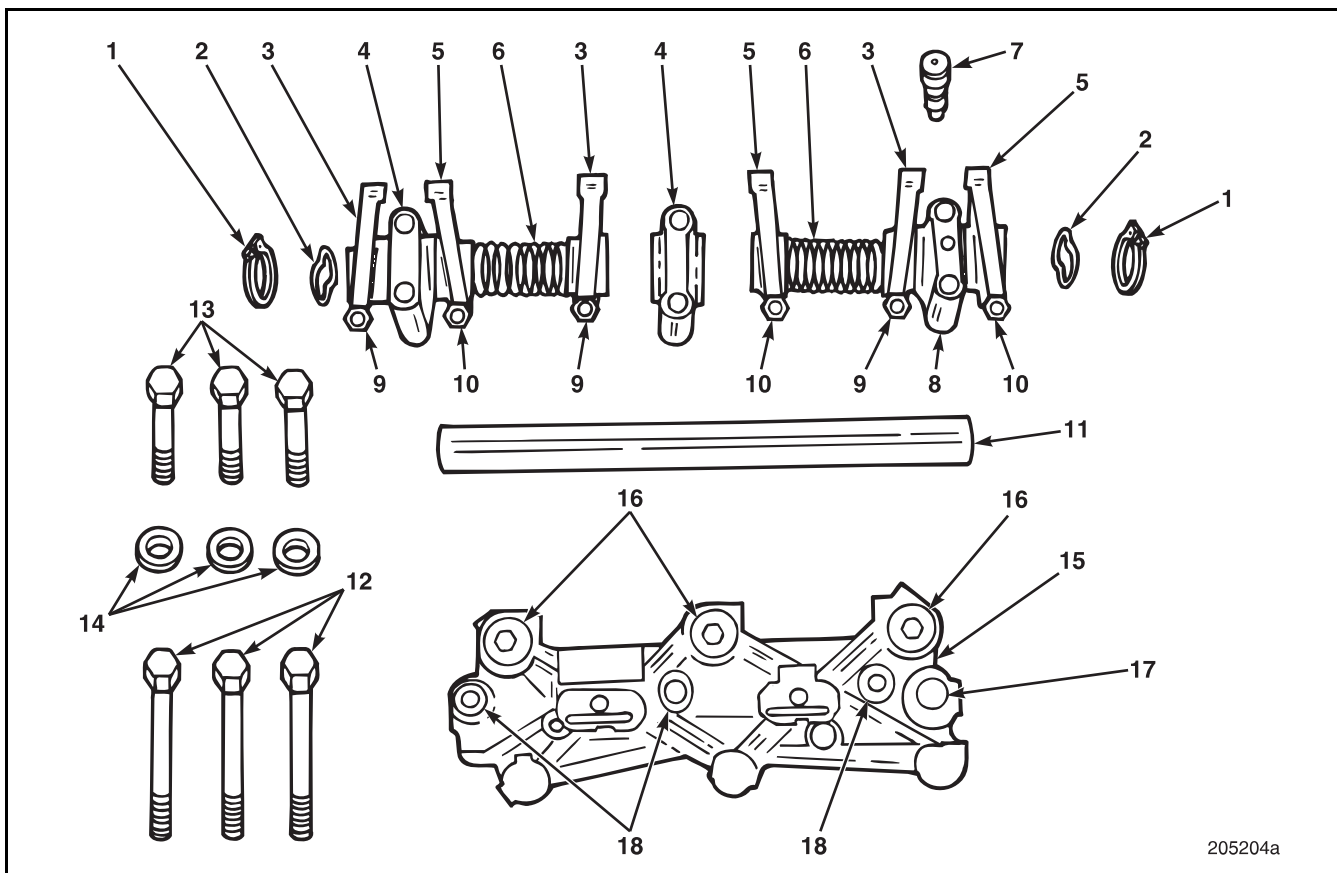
Valve Rocker Arm Shaft Assembly (with Jacobs Engine Brake)
